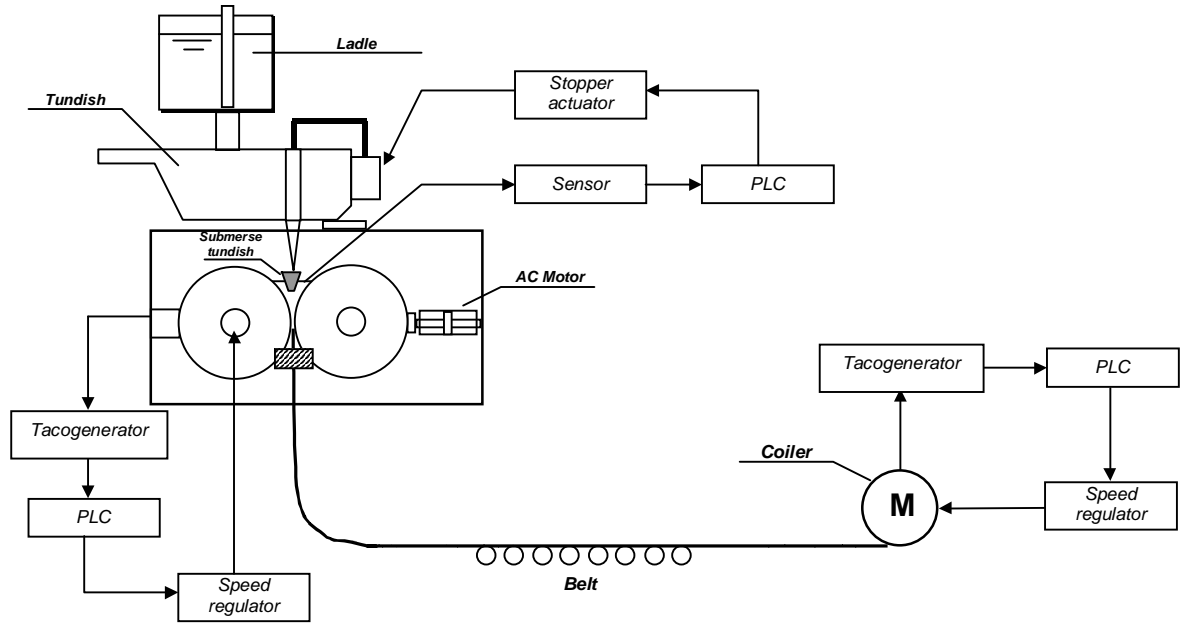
Schematic layout of the strip-caster pilot plant installed at IPT São Paulo.
